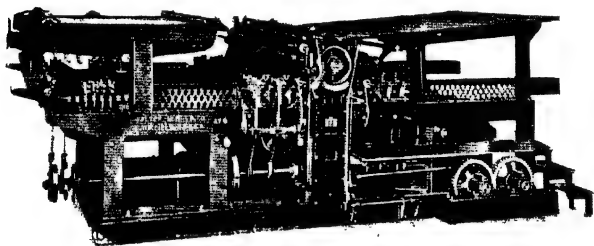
The Scott Stop cylinder Flat-bed Machine.
